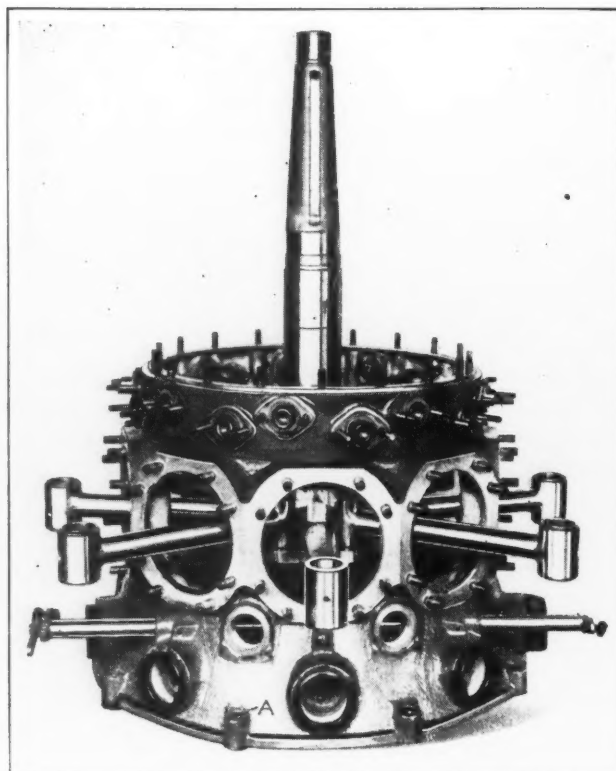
Partially Assembled Crankcase, Crankshaft, and Connecting-rods
